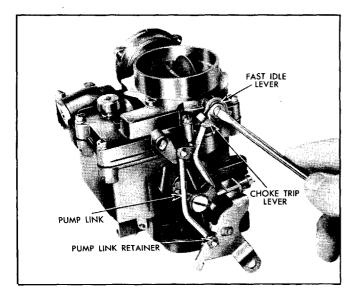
B-86 Removing or Replacing Choke Trip Lever
